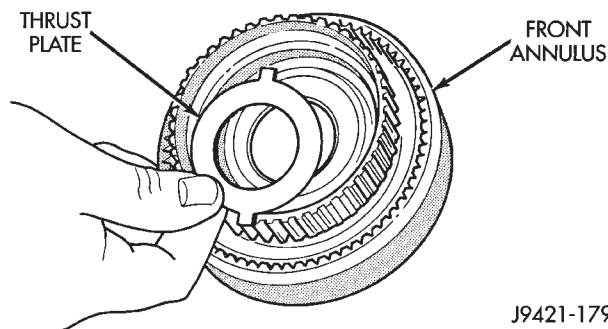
Positioning Thrust Plate On Front Annulus Support
